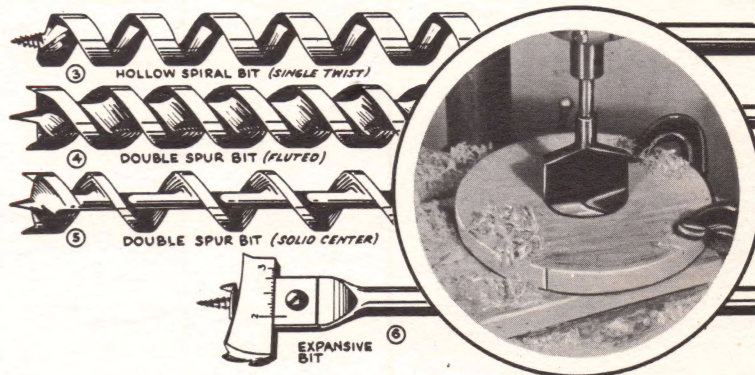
Hollow Spiral Bit—cuts fast, is used for deep holes. It does not make a smooth hole.
